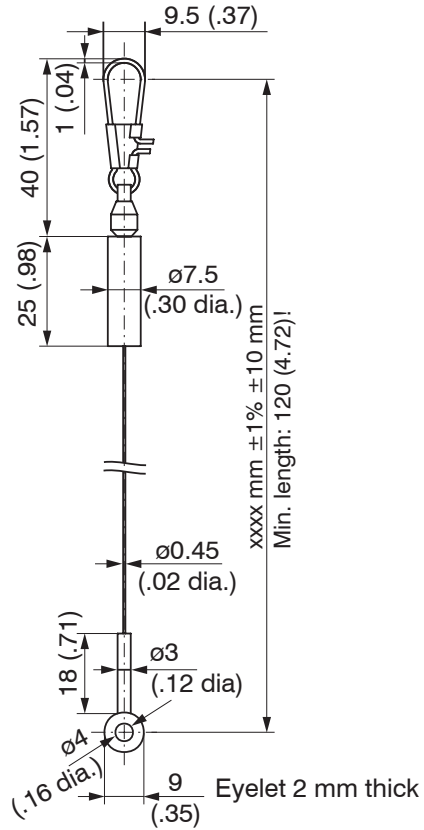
Wire extension WE-xxxx-CLIP, dimensions in mm (inches)
